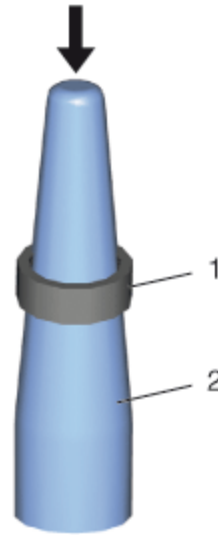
Combustion Fuel Injector Seal And Long Mounting Sleeve
